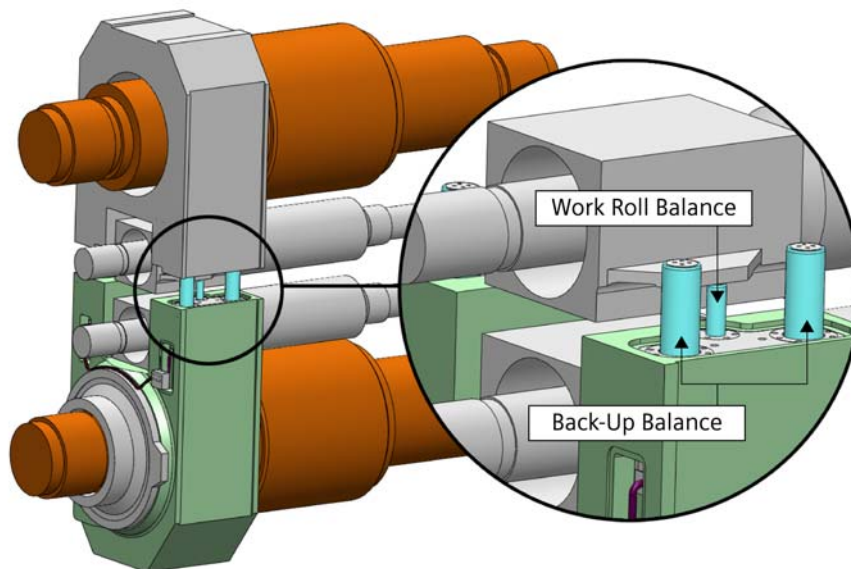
shows the upgraded bearing. The chocks are new, so they fully support the bushing with proper alignment and clearances. The rolls, sleeves, and bushings are reused, providing significant cost savings. HL locks (Hydraulic with Lock ring) replaced the old QC design.
